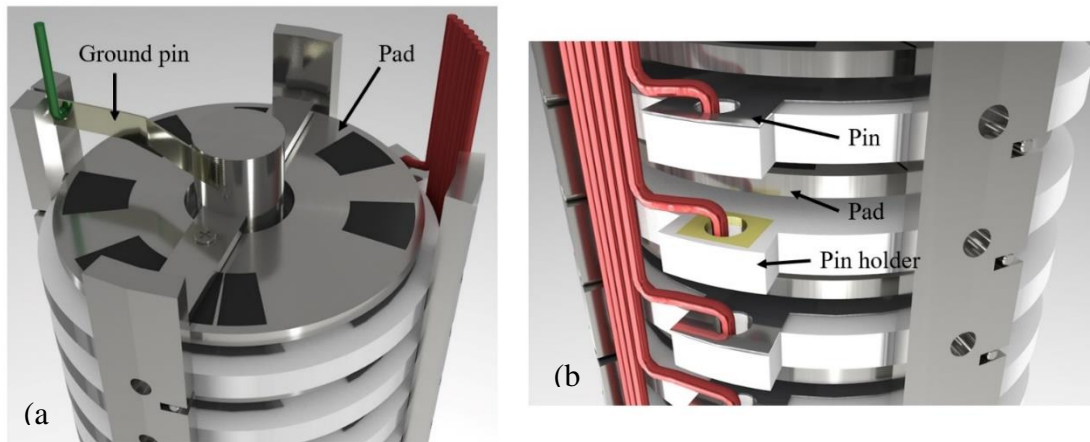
(a) The ground pin is assembled within the notch of the housing and contacts with the shaft. The pad is assembled with the shaft by a rectangular plug. (b) The stacked relationships between pins and pads have changed. Signal wires are soldered with pins. The yellow area on the pin holder is the thermal isolation material, such as the ceramic. It is used to protect the pin holder from high temperatures during the soldering process.
